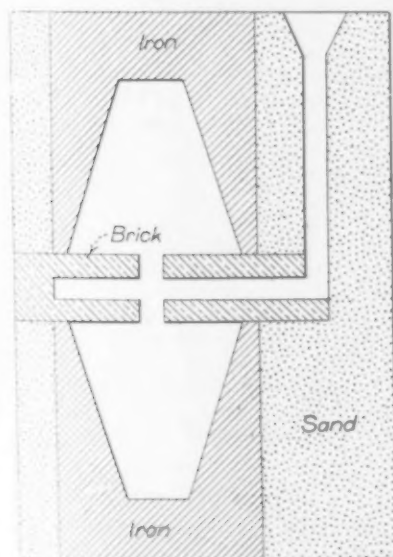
Method of Pouring Pieces Shown in Fig. 2
